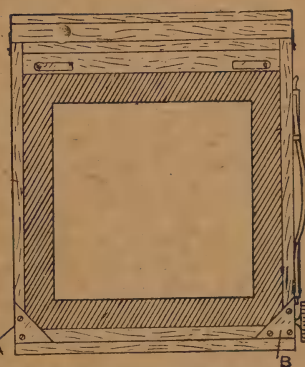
End Elevation of Camera, with Reversing Back Removed
